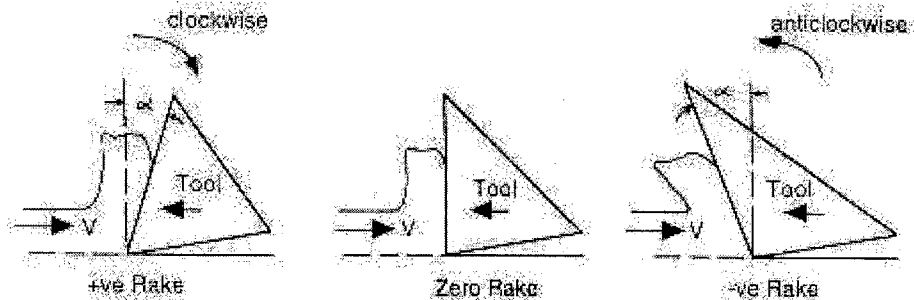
Nomenclature of a Cutting Tool in Machining Showing Positive, Zero, and Negative Rake Angles
